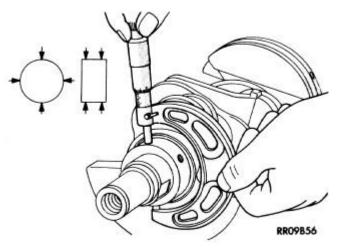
Measuring Crankshaft Journal Courtesy of CHRYSLER GROUP, LLC
